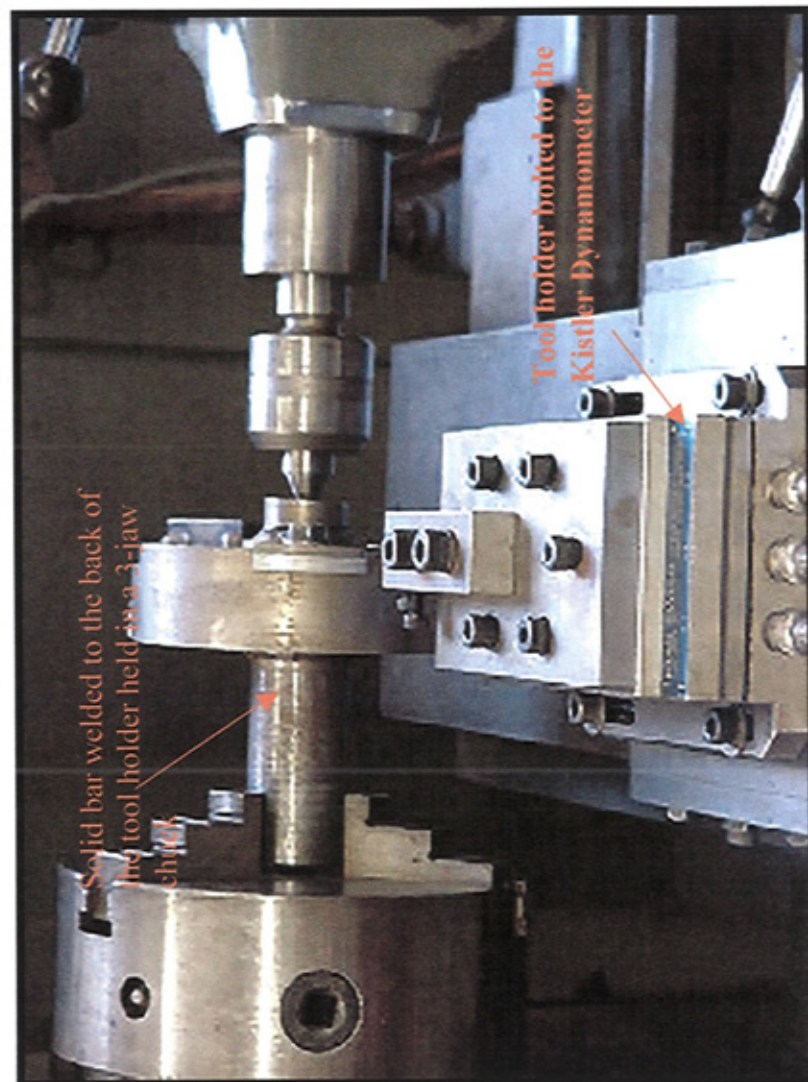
Workpiece holder inserted into a 3-jaw chuck
